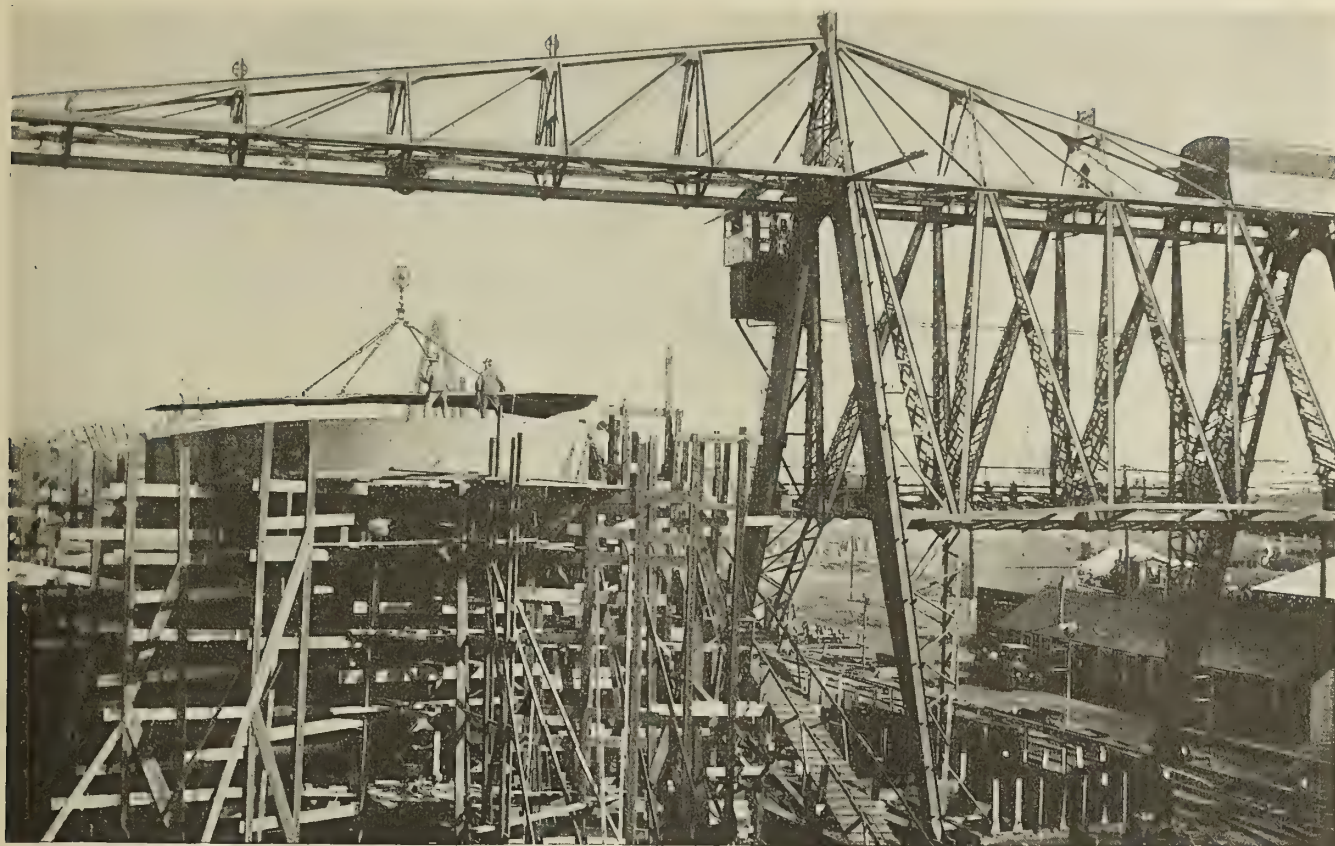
Section of Plating Assembled on the Ground Hoisted Into Place by Gantries
